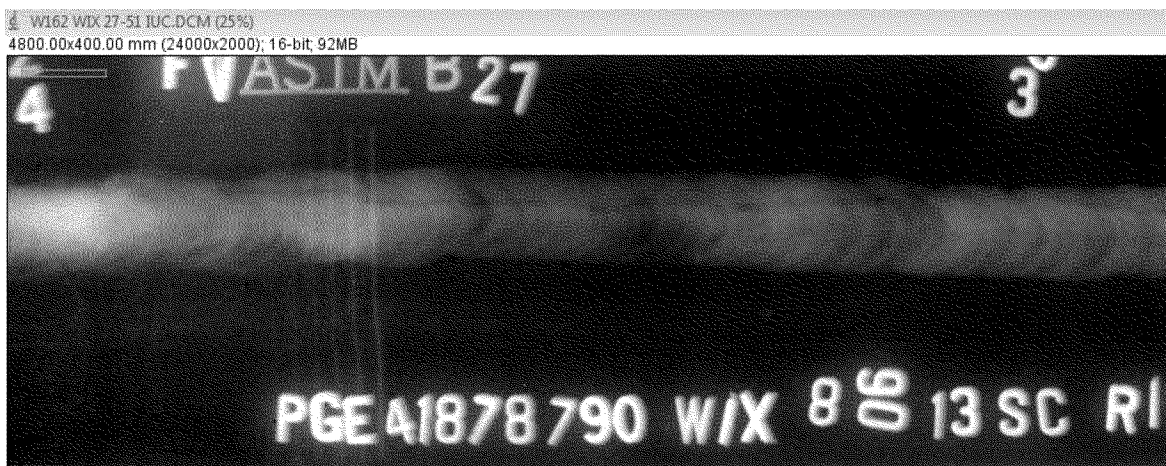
Weld 270 Indication with measurement inset showing length of 0.157” (3.9mm)
